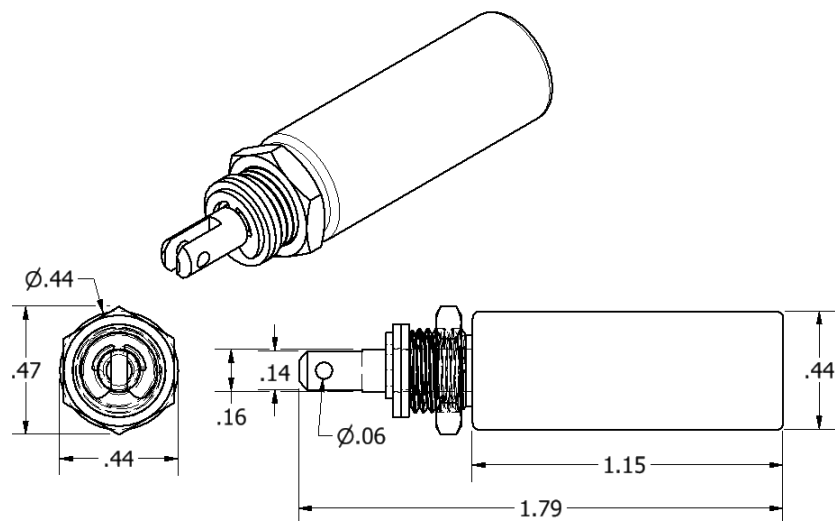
Solenoid for Mark 1 grabber. Dimensions in inches.
